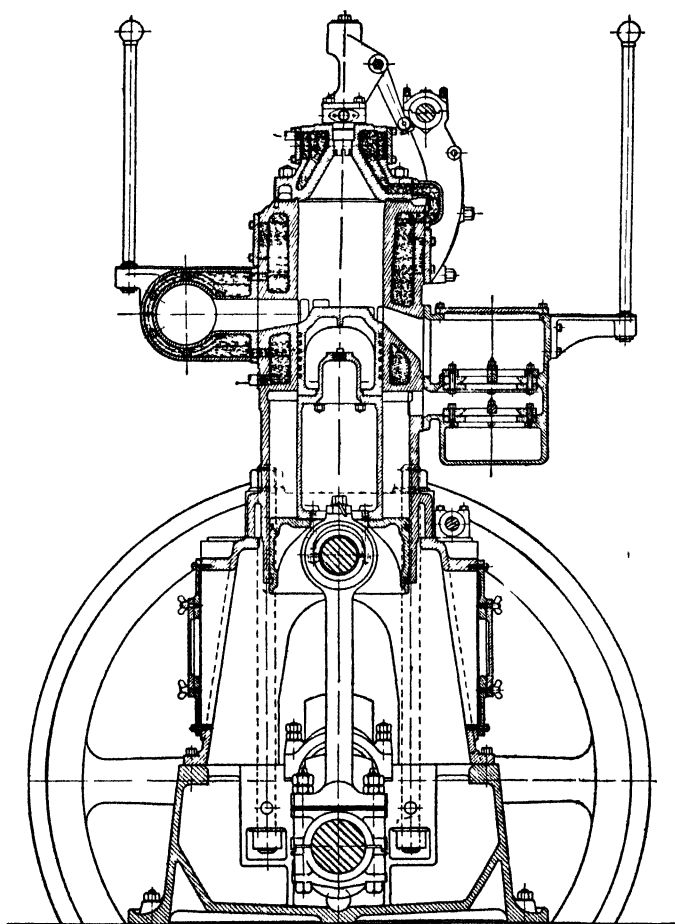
Sectional View of Standard Fuel Oil Co.'s 2-Cycle Engine
